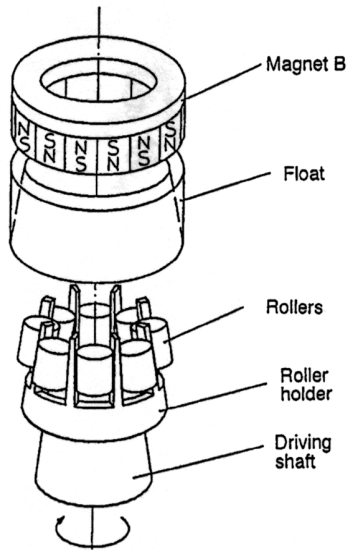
Assembly of magnet B, float rollers, roller holder, and drive shaft
